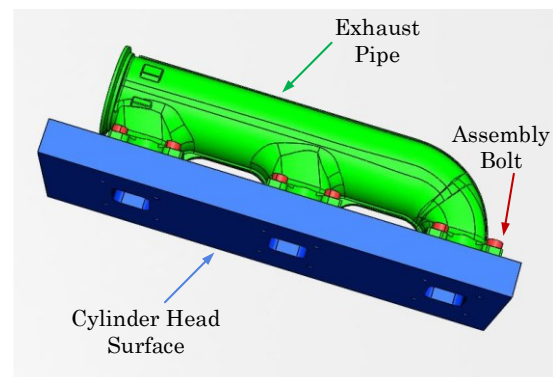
Assembled geometry for thermomechanical analysis of exhaust manifold
